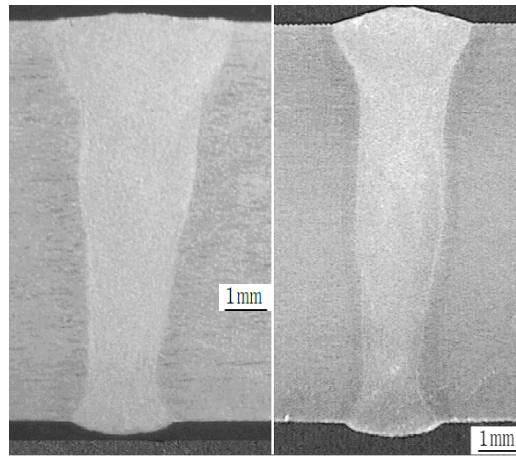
(a) Cross-section of the weld bead of sample A; (b) Cross-section of the weld bead of sample B
